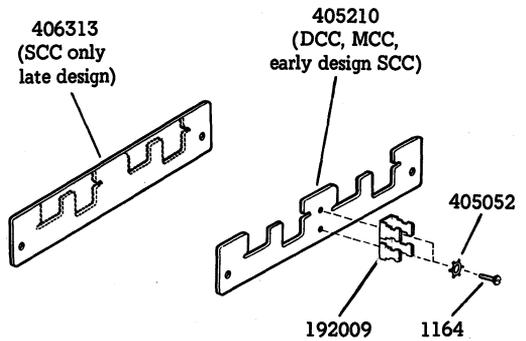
Clamp Plate Components (At Rear of Controller)
